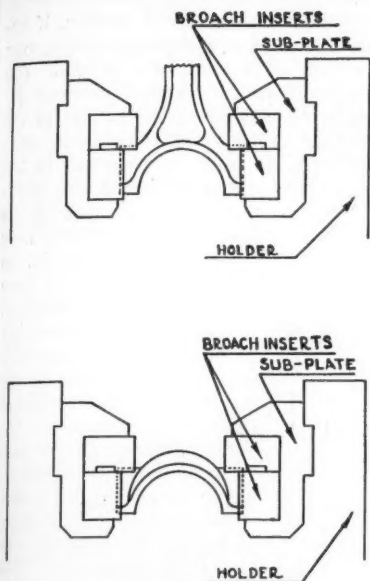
Cross-section drawing showing relation of broach inserts to sub-plate, and of sub-plate to holder.
